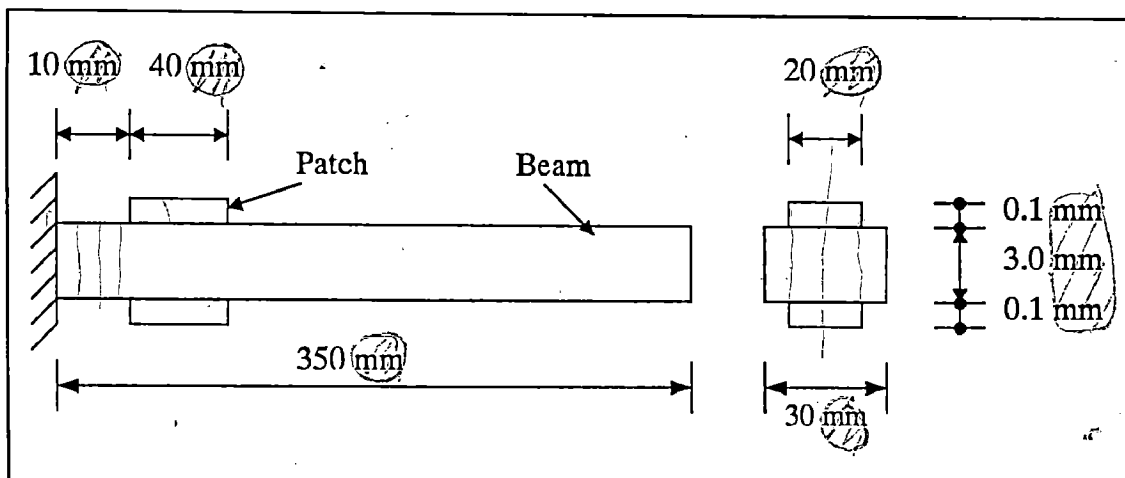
Cantilever Beam with Piezoelectric Patches
